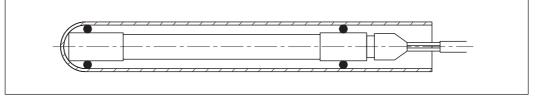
Lamp with O-rings to assist insertion into lamp protection tube
